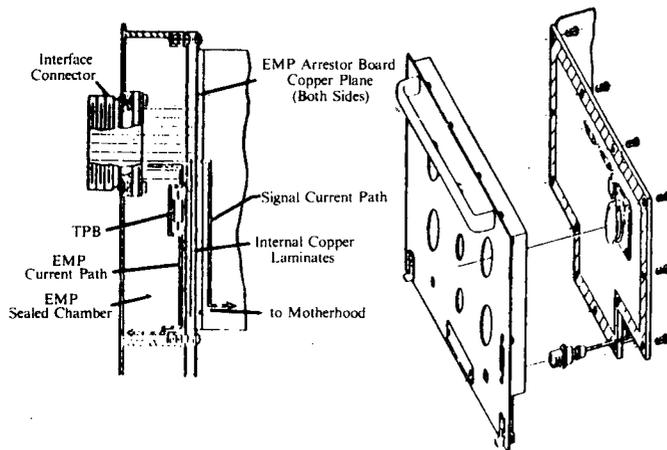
Mechanical Layout of TPD Shielded Enclosure.
